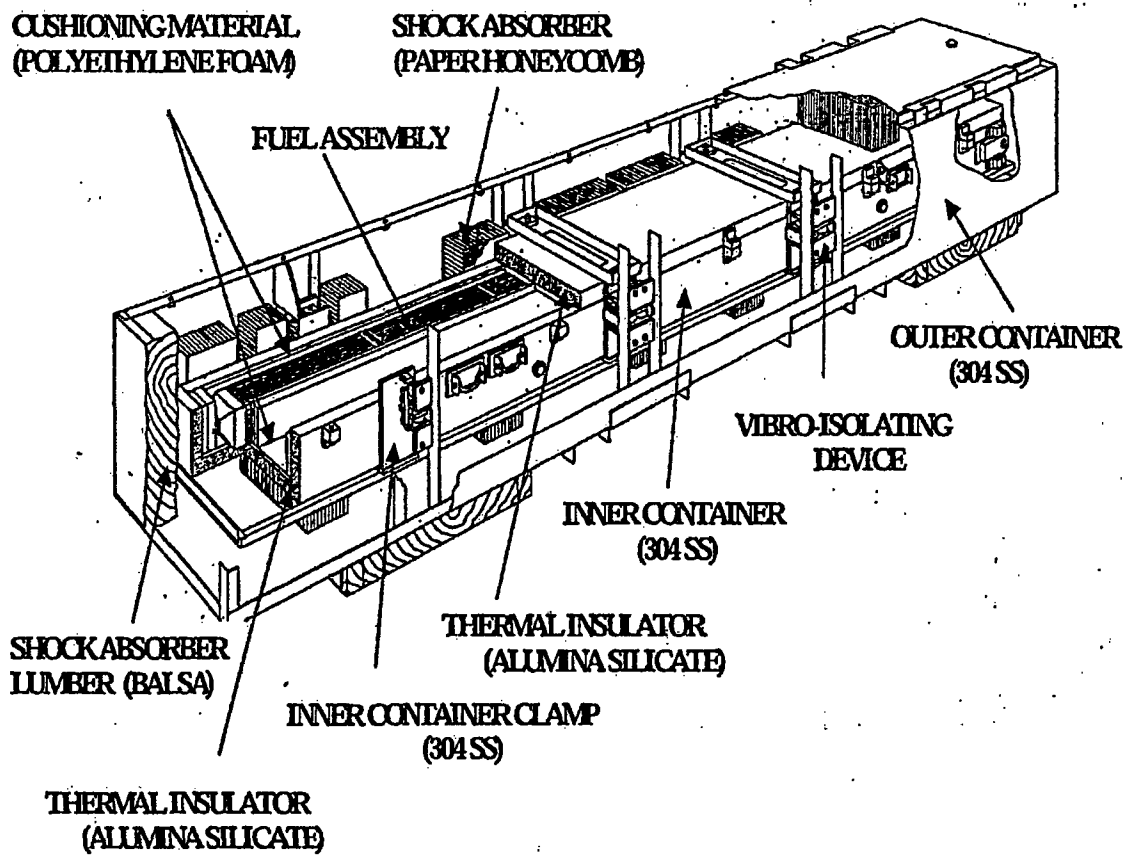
TN-B1 PACKAGE ASSEMBLY
